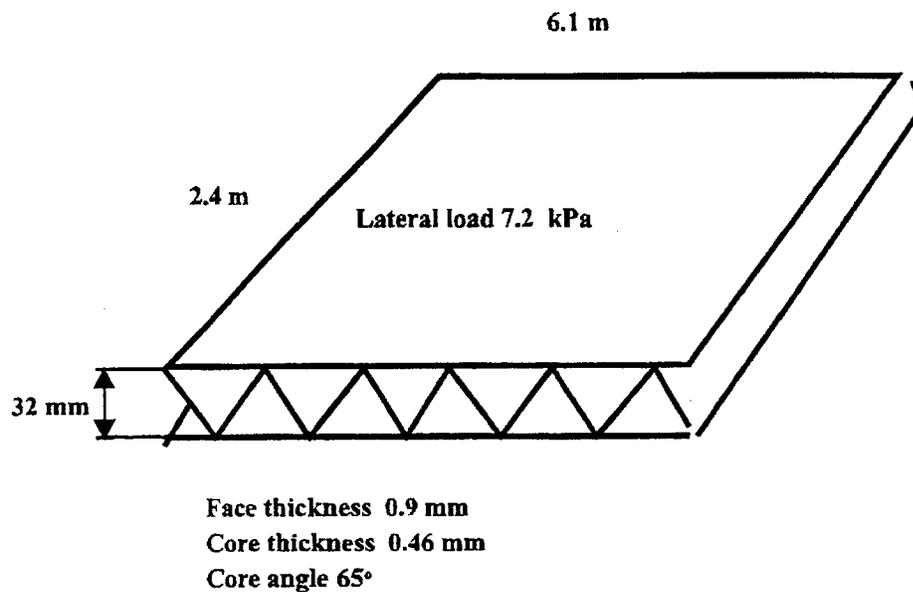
Deck structure, HSLA 80 steel (Sikora 1990).
